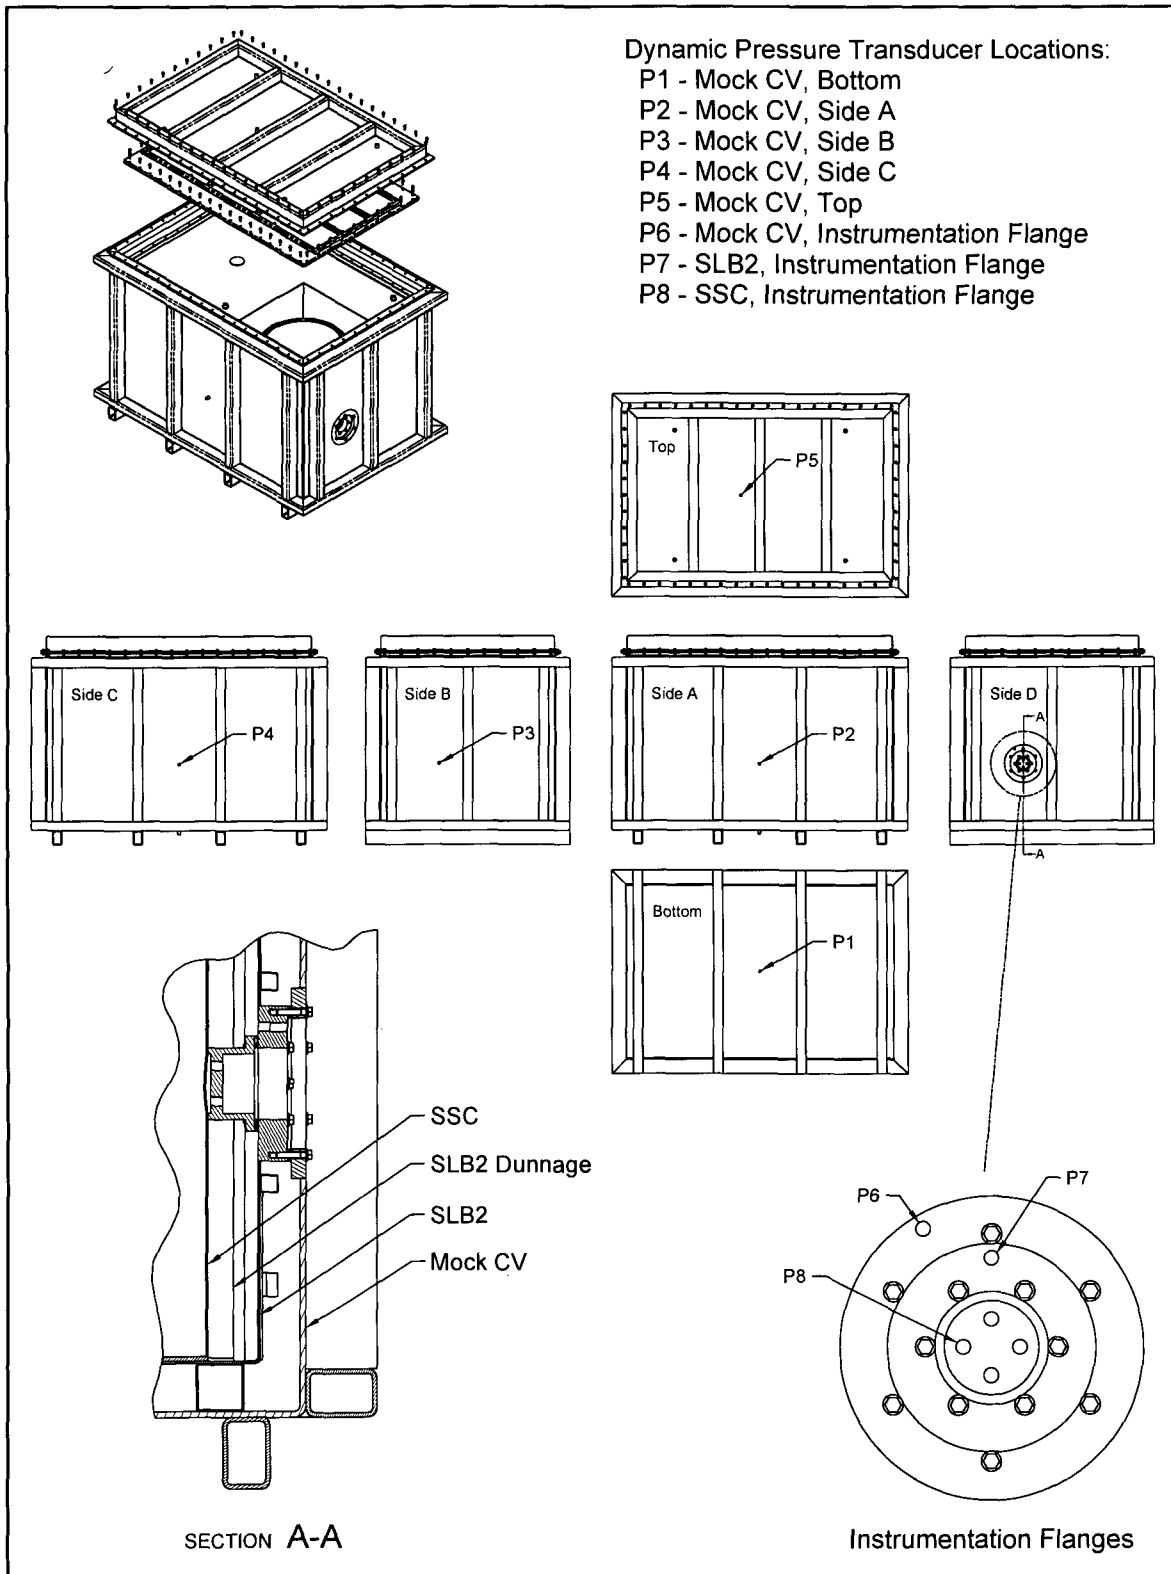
Deflagration Test Assembly Transducer Map
